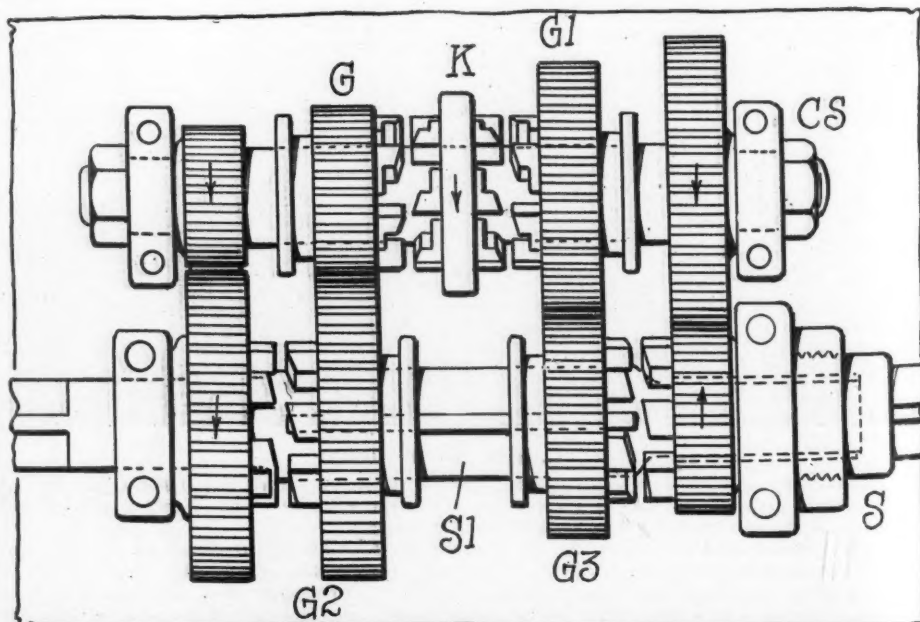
COTTA INDIVIDUAL CLUTCH GEARSET
